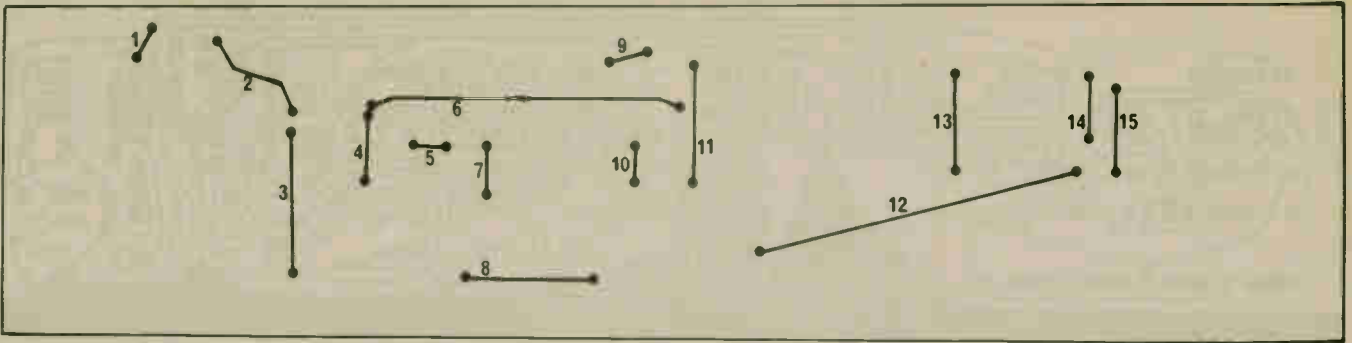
Linking required on the oscillator board. This should be installed before components are fitted.
